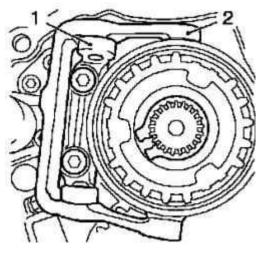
Withdrawal of support bearing with a yoke with the back cover: 1 - a support bearing 2 - rocker
